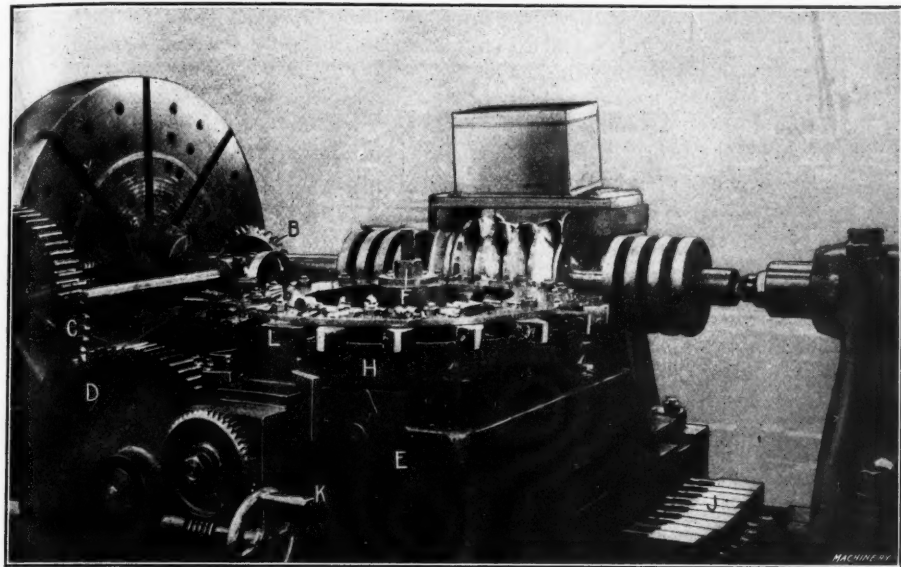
Generating Thread of a Large Hindley Worm for the Battleship New York
